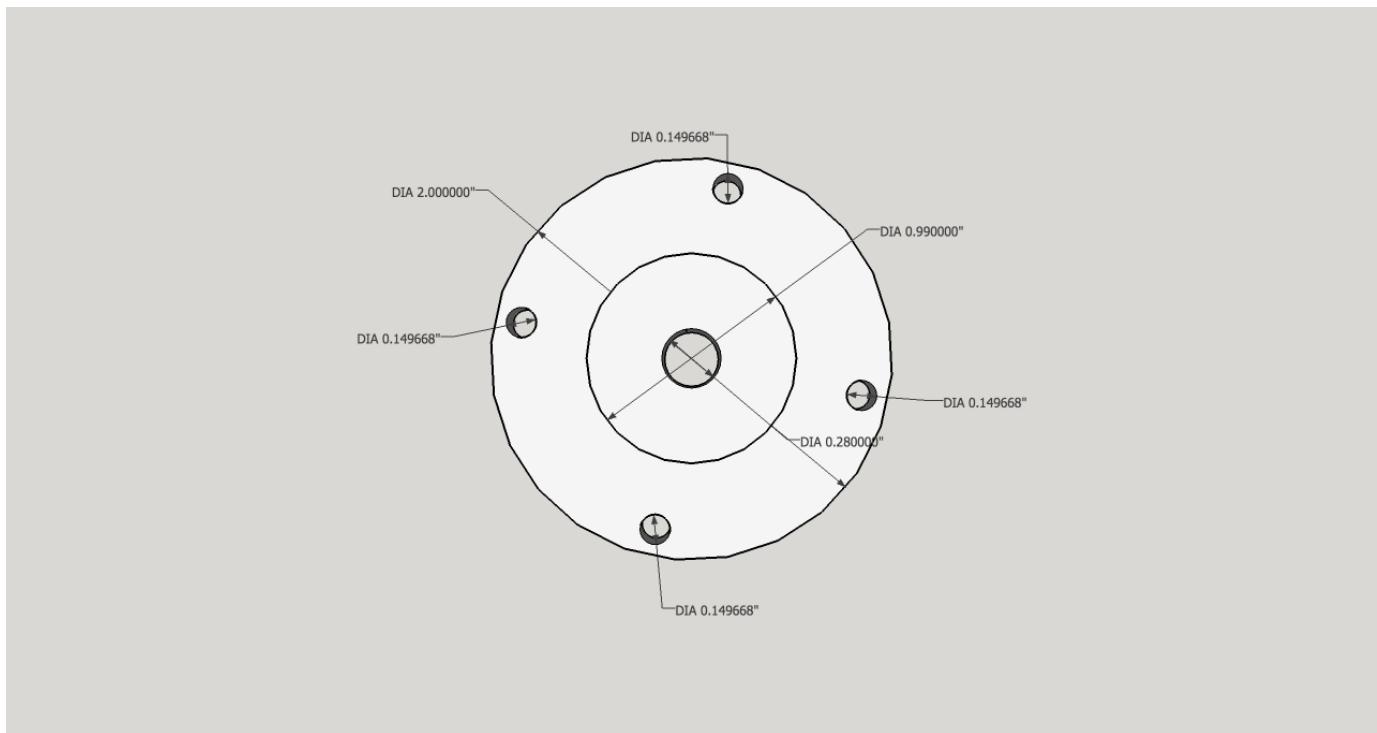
The top down view and measurements of the PZT-Mirror holder
